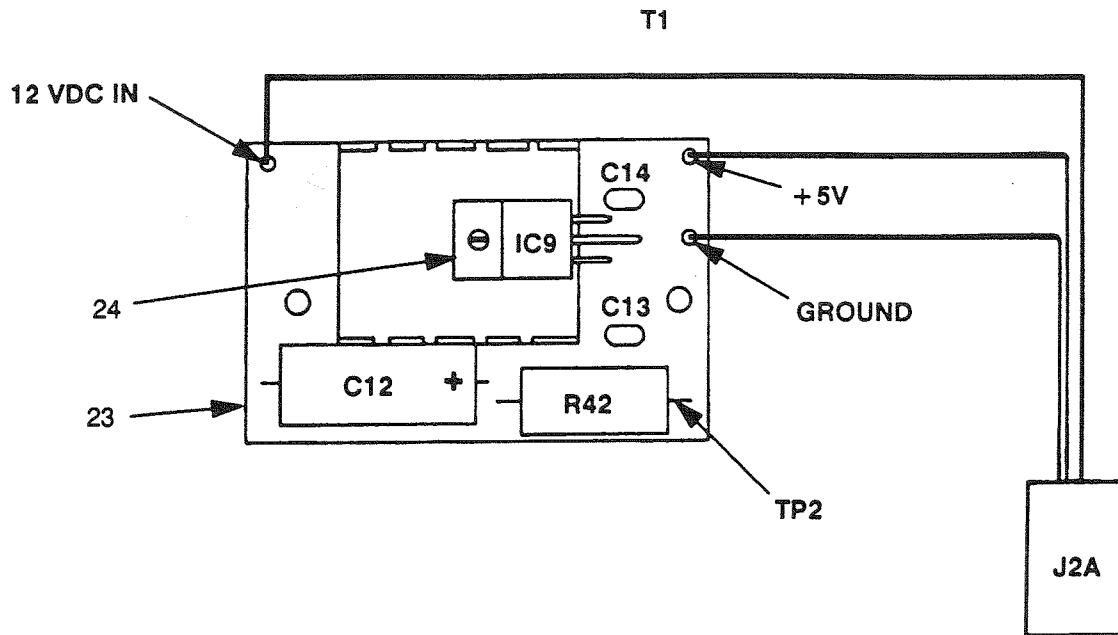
EPS 5 Volt Power Supply Assembly Part No. 27788-342
